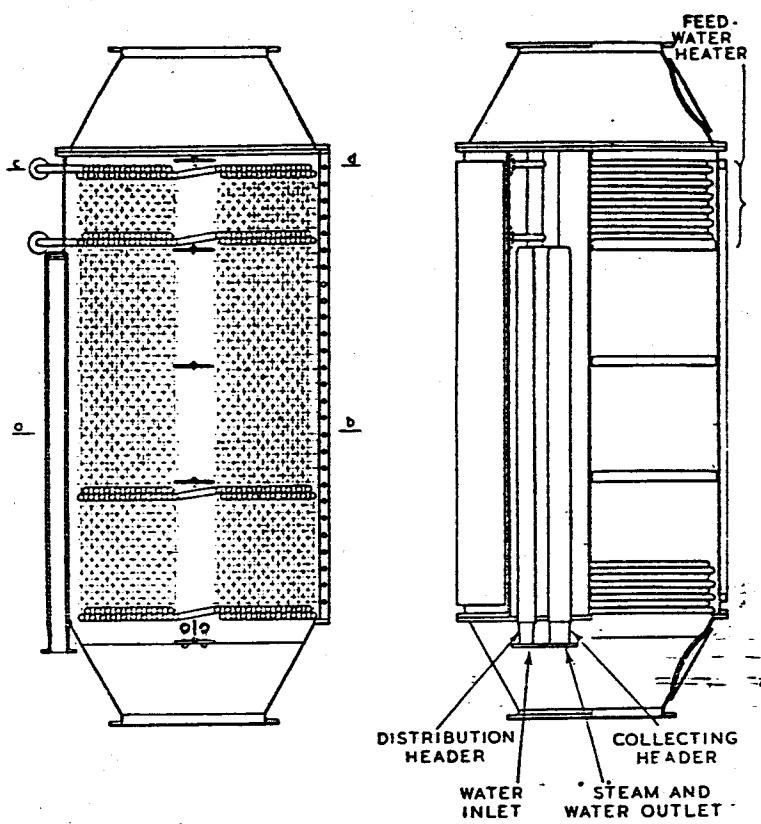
COMPOSITE THIMBLE TUBE BOILER
